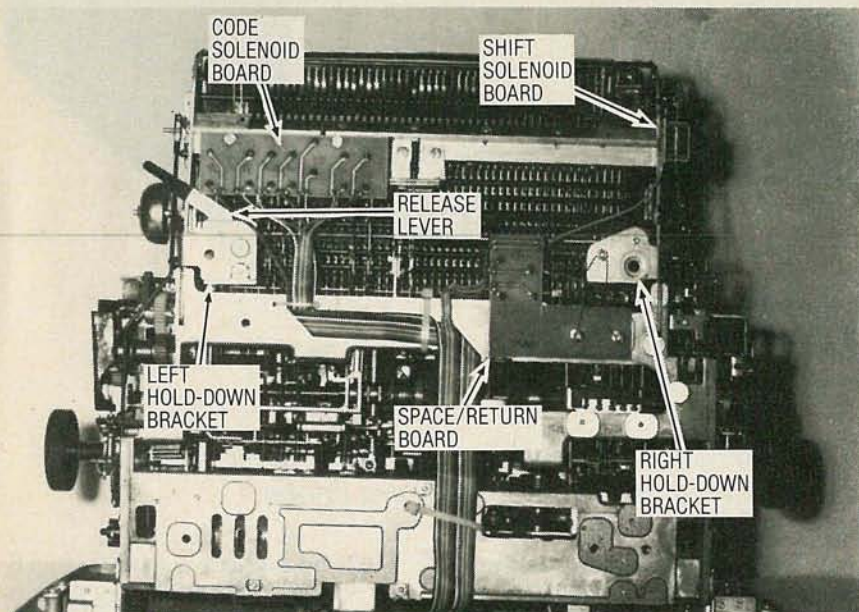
TILT THE ASSEMBLY back so that it rests as shown.
